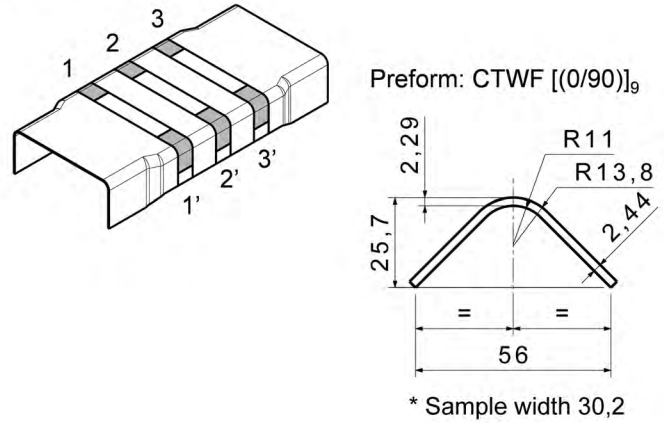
Schematic drawing of 'L' shape samples location into each specimen and average dimensions.
